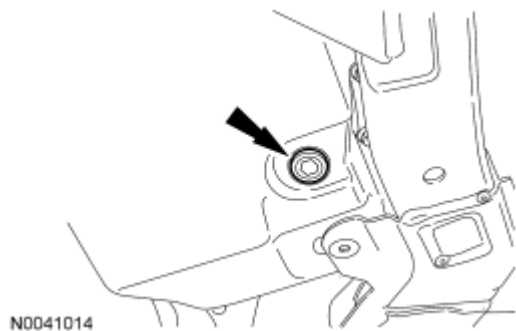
Locating Transmission Fluid Pan Drain Plug
